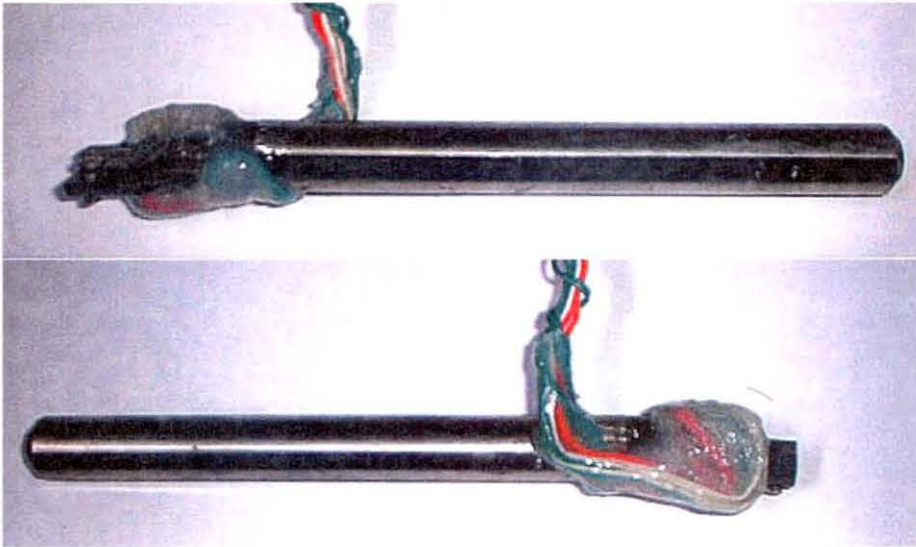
The boring bar was instrumented with strain gauges on one side.
